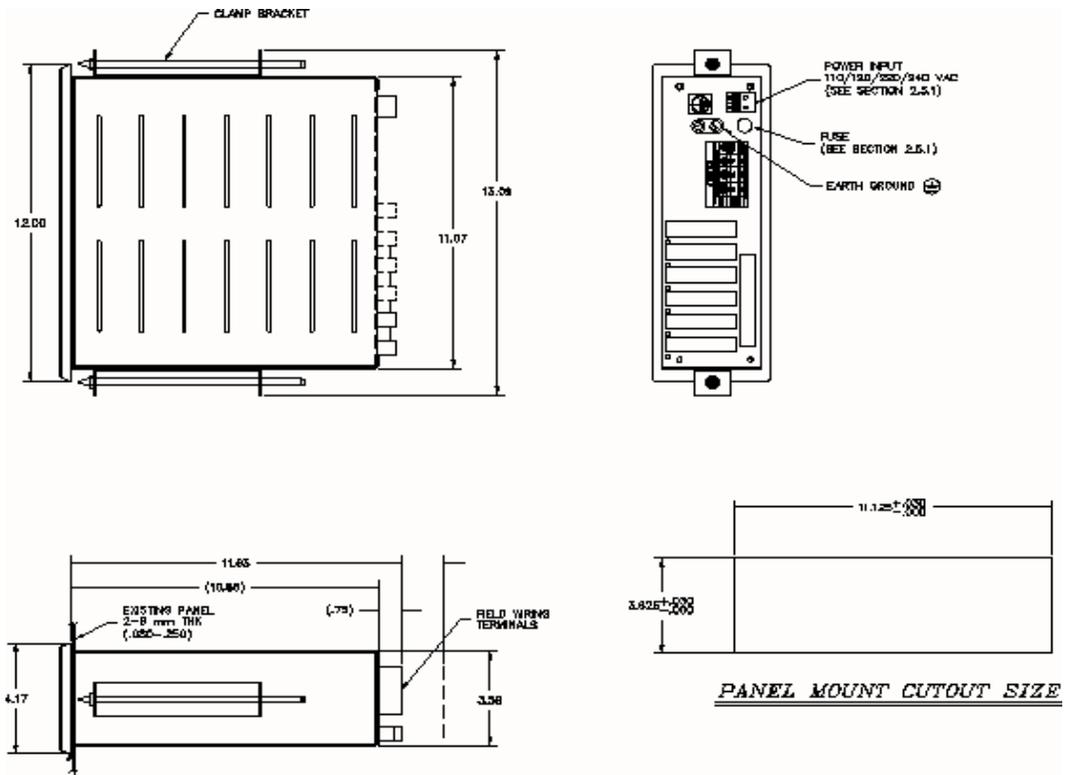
Electrical & Mounting Guidelines - Panel Mount Installation
